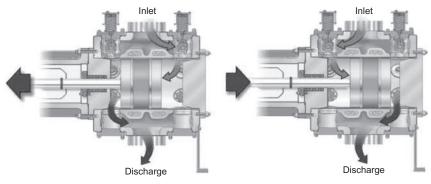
Sectional view of a single-acting cylinder. Courtesy of Dresser Rand Company.
